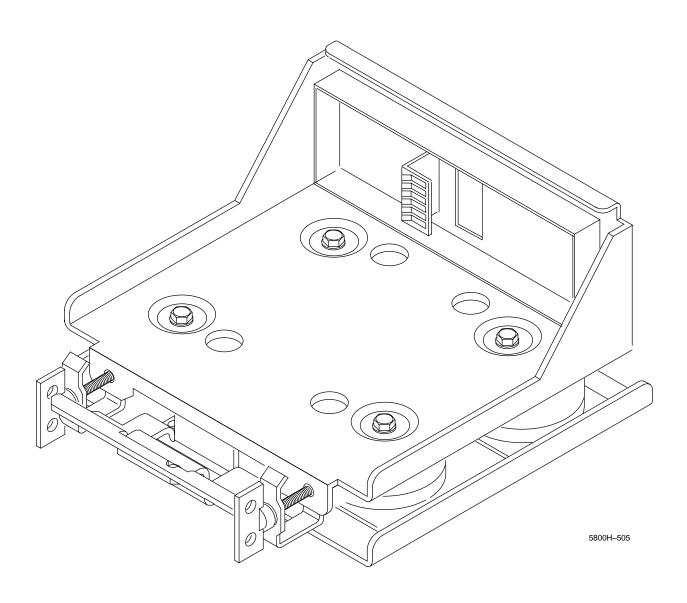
RF-5211-01VSM Shock Mount Assembly
